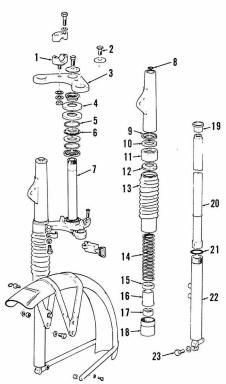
Exploded view of front suspension units typical of G5 and G6 models.
